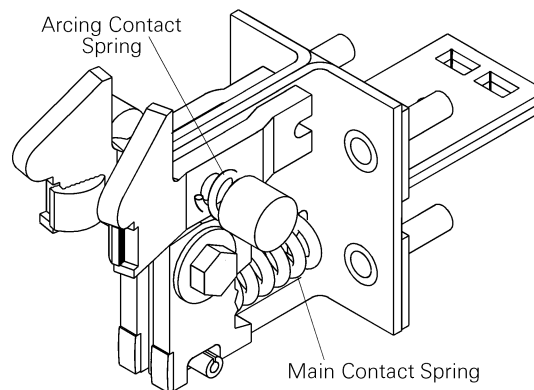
Upper Contact assembly for WPS08 and WPF08.
